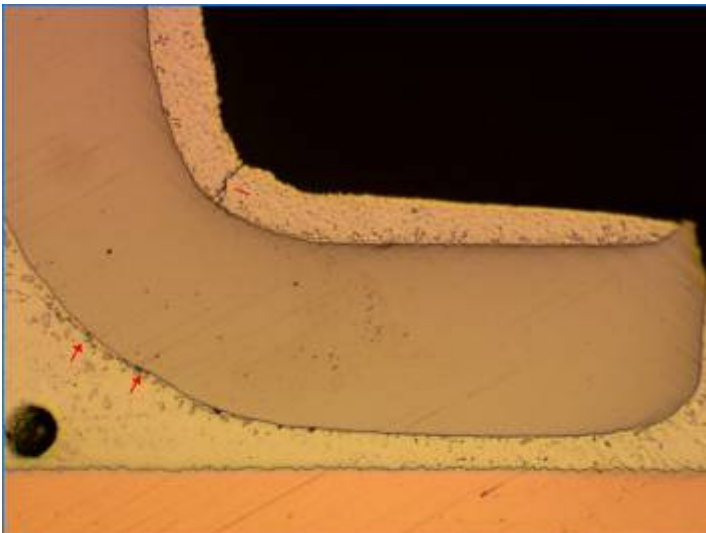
cross section, SN79, U12, right lead solder partial crack, 200xb
